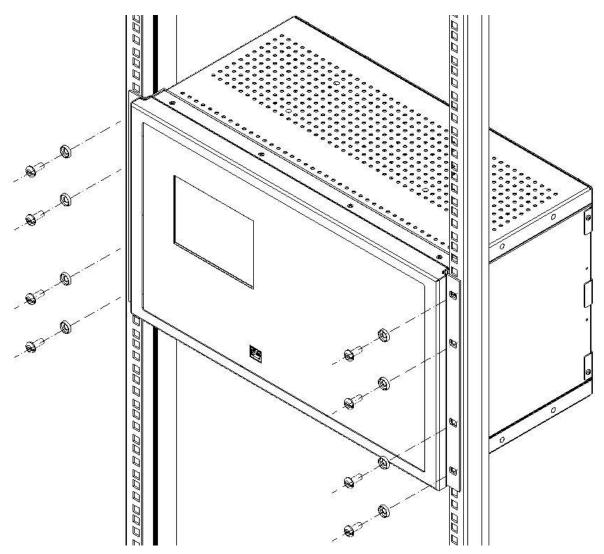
Assembly of the TPU L500 in a 19" panel rack or cabinet.
